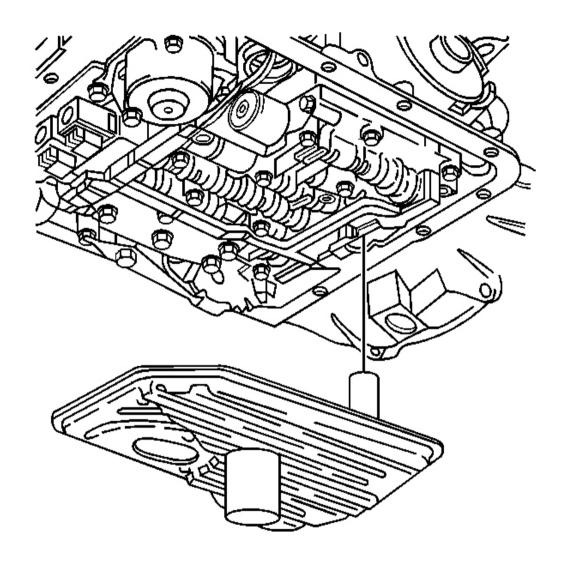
Oil Filter Courtesy of GENERAL MOTORS CORP.
